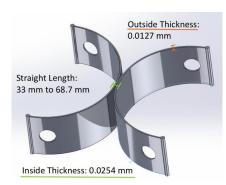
Butterfly Design Solidworks 3D Model. This design consists of two sectional matrix bands conjoined together in the middle to produce a band that slightly resembles a butterfly. Holes in the band will help to aid the removal of the device.
